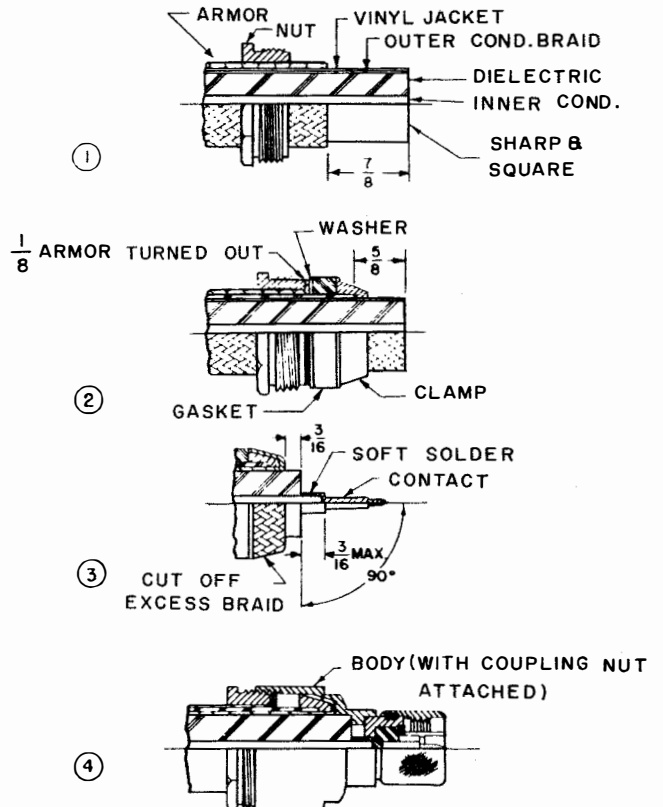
Assembly of Type UG-167A/U Plug Connector to Cable
